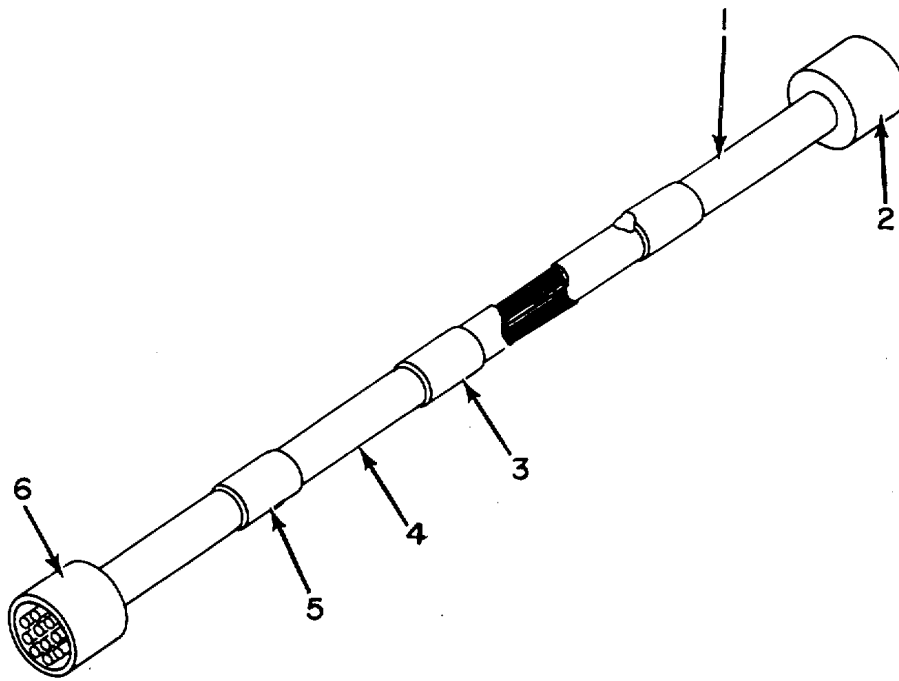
Cable Assembly, Special Purpose, Electrical CX-12630/U (W-14).
